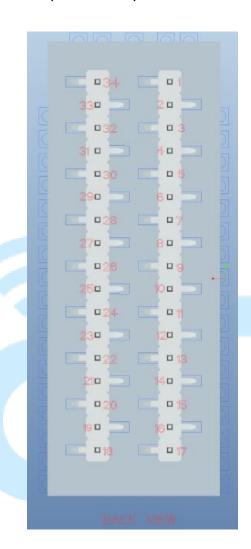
GL6509 SMT Type Recommend PCB Footprint.
